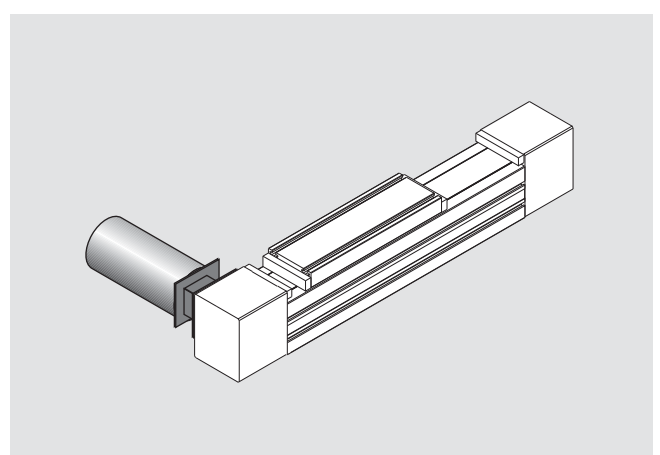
Free shaft end right hand side (FSR Mounting Type)
